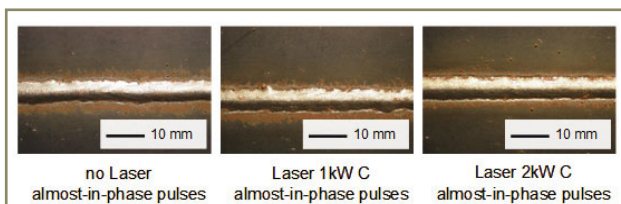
General appearance of weld beads produced with laser – tandem pulsed GMAW using an inter-wire distance of 10 mm
